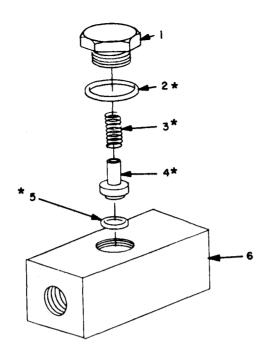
Flow Control Valve, Part No. 88076 *Included in Parts Kit, Part No. 88130
